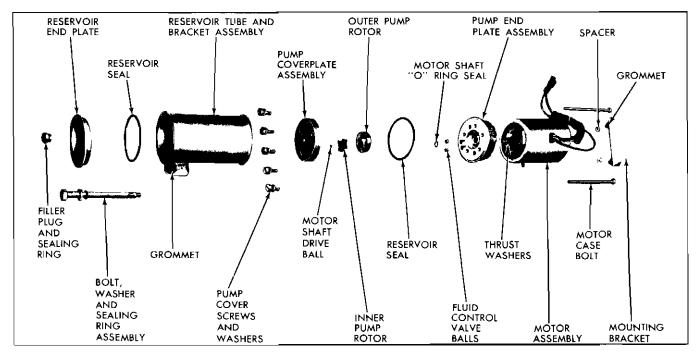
Hydro-Lectric Motor and Pump Assembly-Exploded
